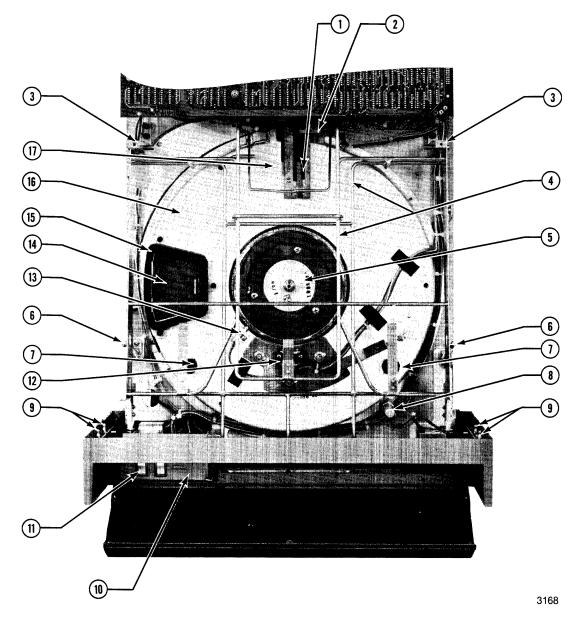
D3000 Extension Disk Drive, Photo Parts Index (Front Load Models)
